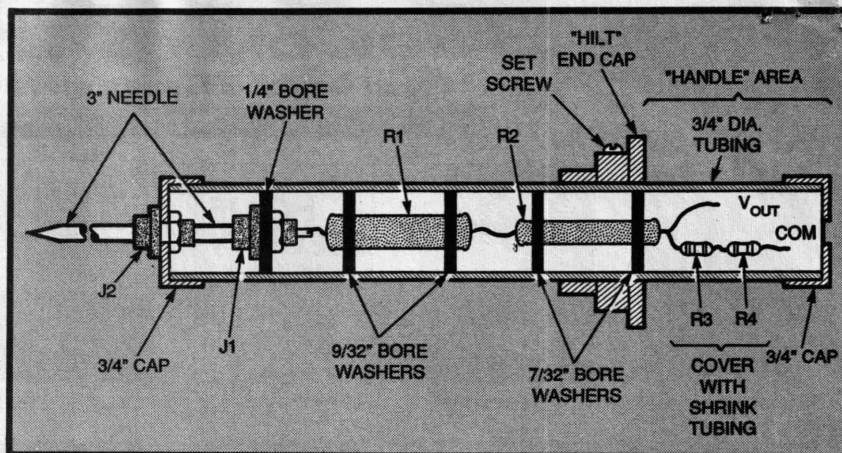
DETAILED ASSEMBLY VIEW of the Mini High-Voltage Probe. The neoprene faucet washers are identified as $\frac{3}{8}$ -inch; however, their actual outside diameter is $\frac{5}{8}$ inch.
